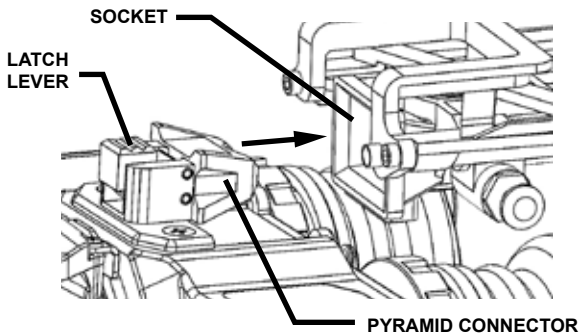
Attaching the TAG to a Head/Helmet Mount
